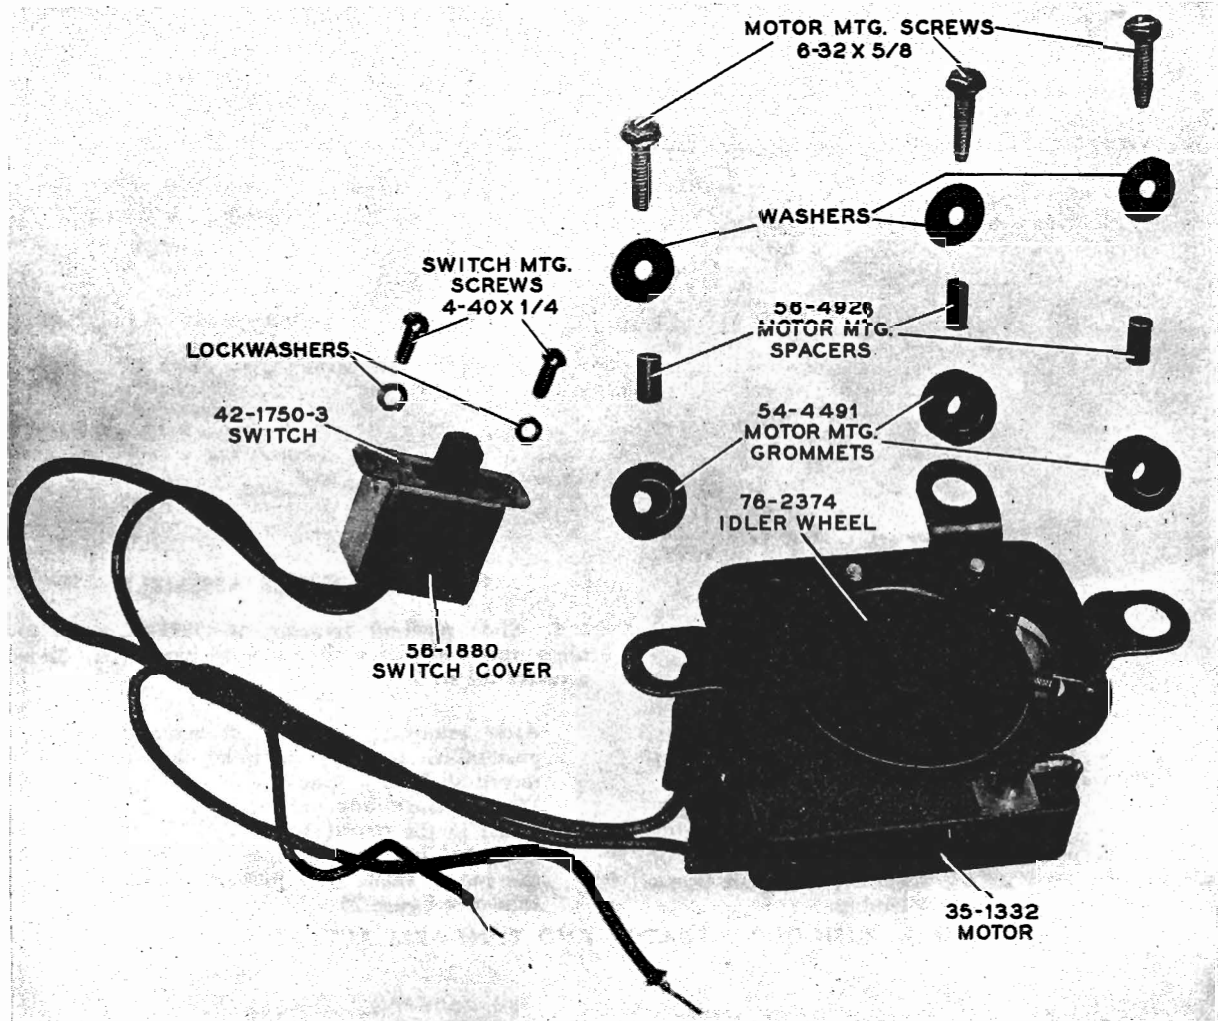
MOTOR, SWITCH, AND MOUNTING HARDWARE
